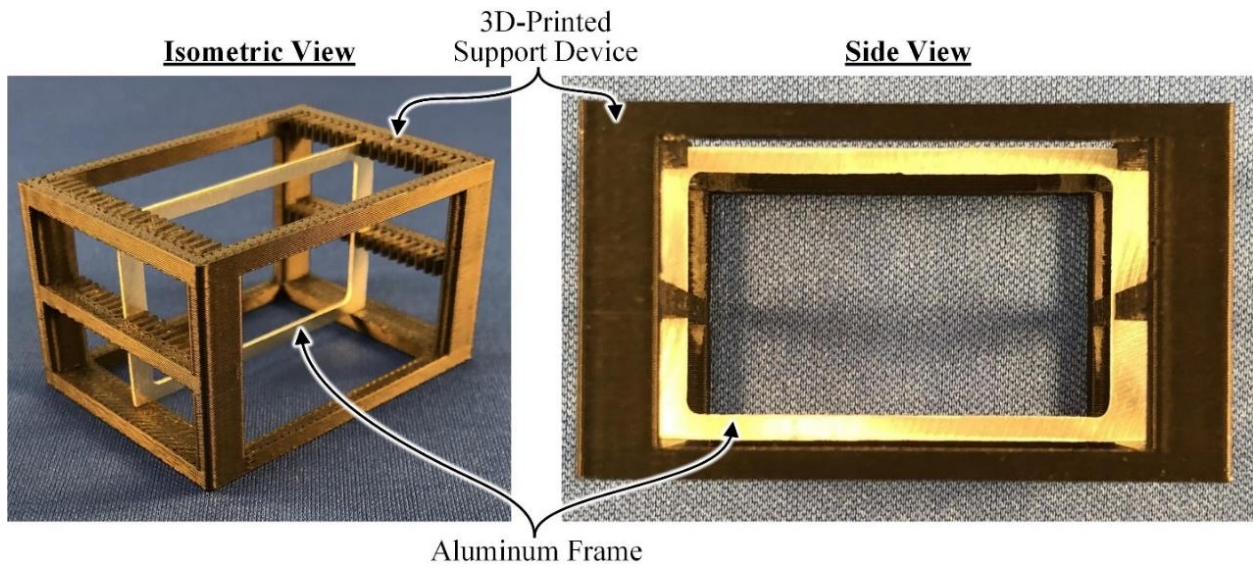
Isometric (left) and side (right) view photographs of the suspension device (3D-printed support device) containing a non-laminated aluminum frame.
